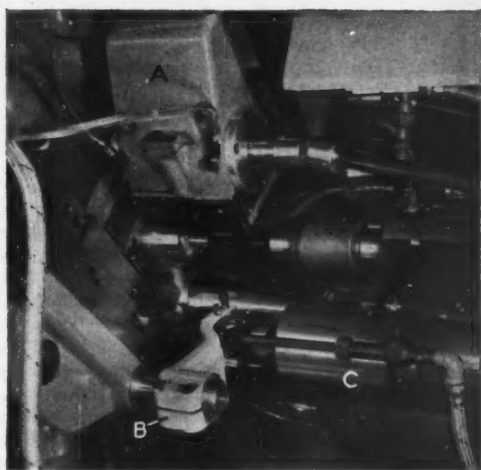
Close-up view of the Schlütte type SE. 16 automatic fitted with a thread chasing attachment and a work pick-off unit
